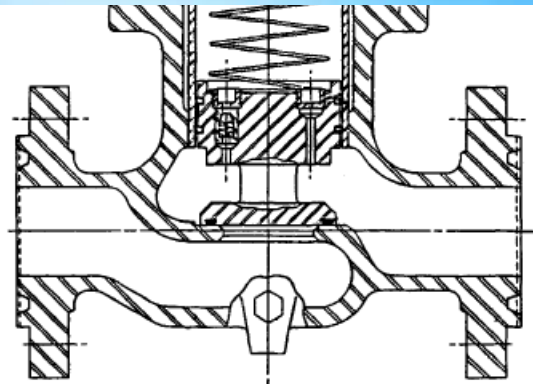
Piston check valve. (Courtesy of Wheatley Pump and Valves, Inc.)
